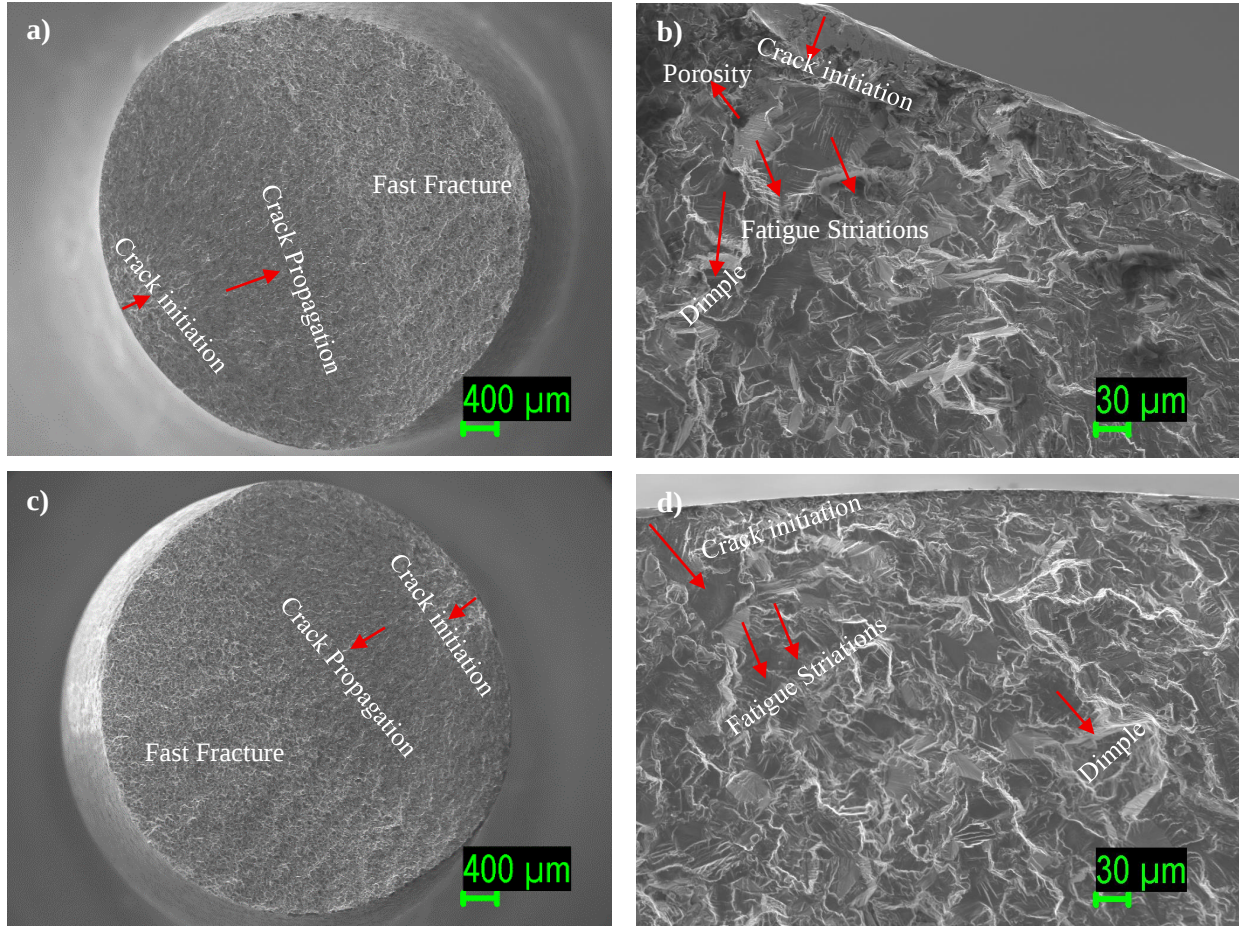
a) Atmosphere-controlled heat-treated sample fatigue macrography, b) Atmosphere-controlled heat-treated sample detailed crack initiation area, c) Vacuum heat-treated sample fatigue macrography, d) Vacuum heat-treated sample detailed crack initiation area (a) Atmosfer kontrollü ortamda ısıtılmış numunenin yorulma makrografisi, b) Atmosfer kontrollü ortamda ısıtılmış numunenin detaylı çatlak başlangıç alanı, c) Vakum ortamında ısıtılmış numune yorulma makrografisi, d) Vakum ısıtılmış numunenin detaylı çatlak başlangıç alanı)
